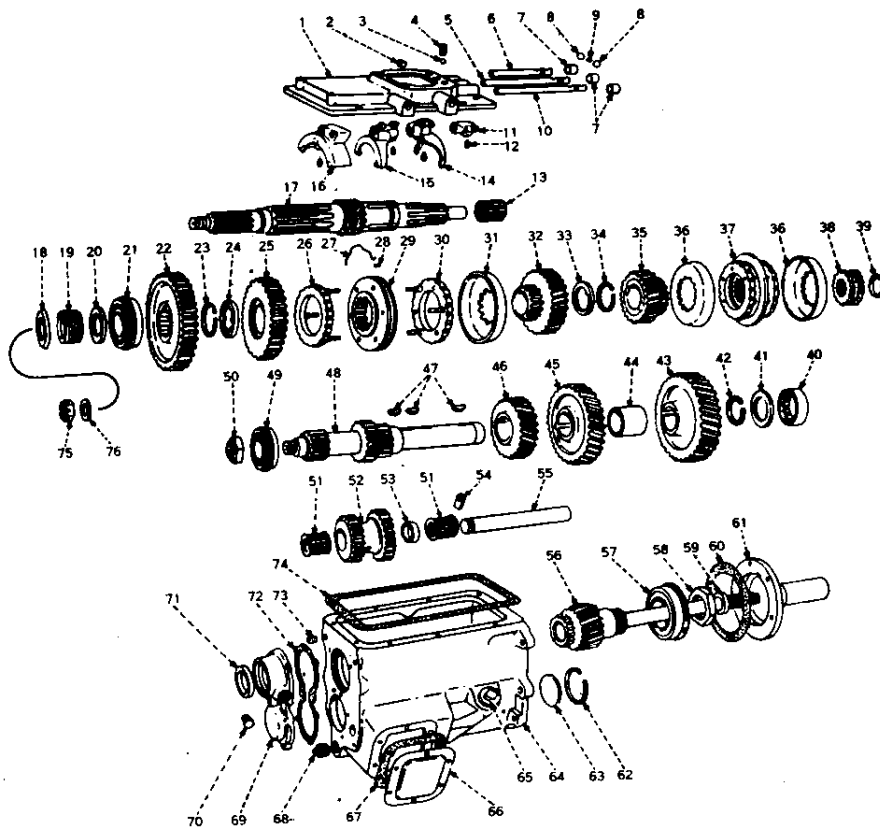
TRANSMISSION (EXPLODED VIEW)
